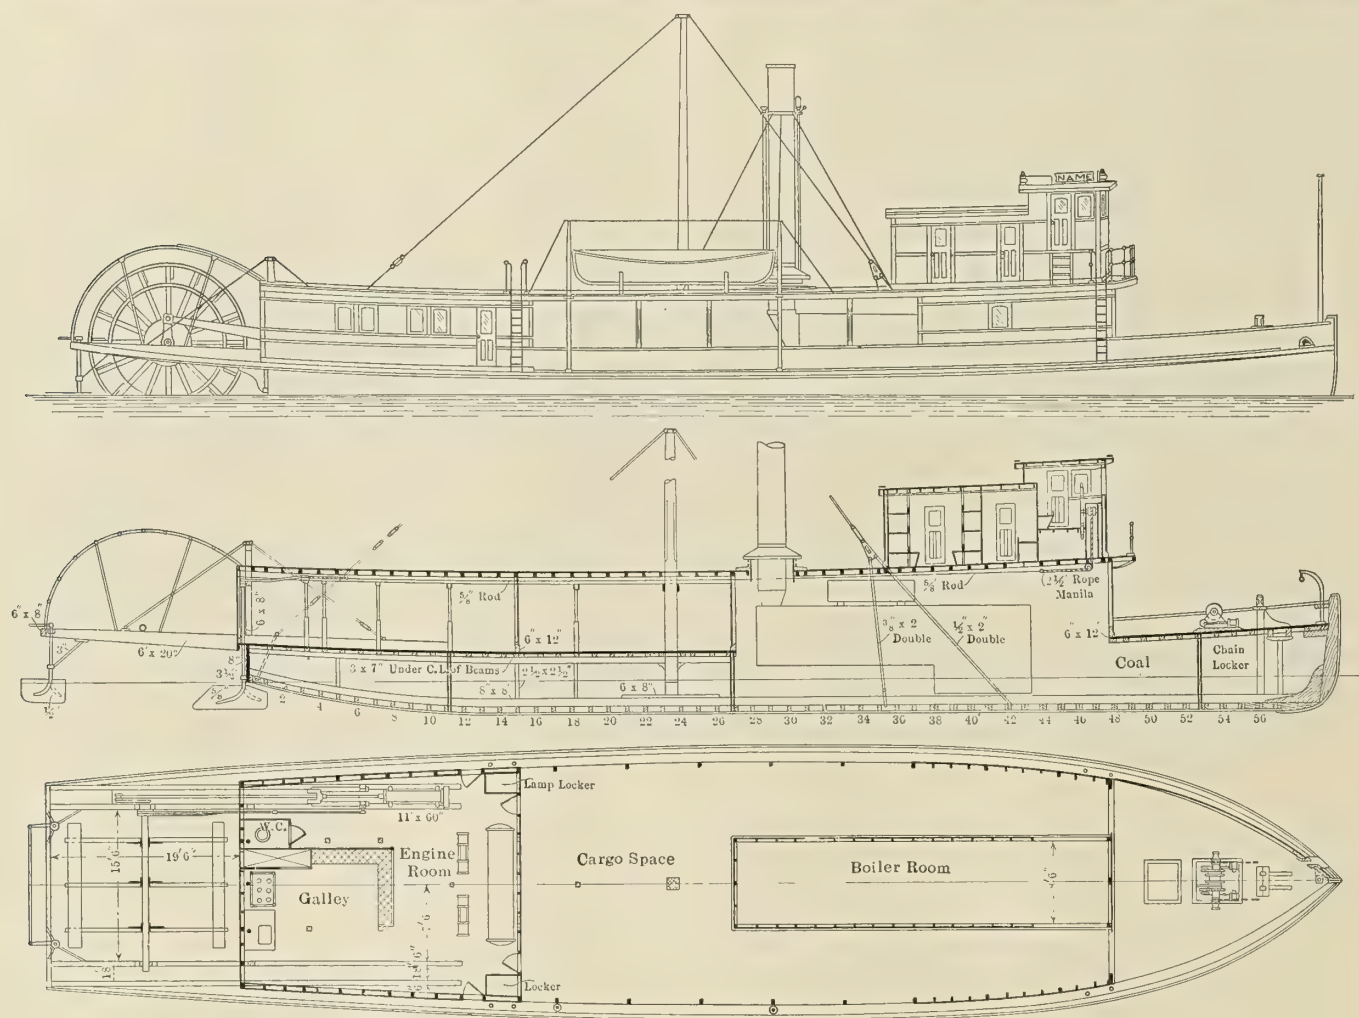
OUTBOARD PROFILE, LONGITUDINAL SECTION AND DECK PLAN OF THE W. H. BANCROFT
